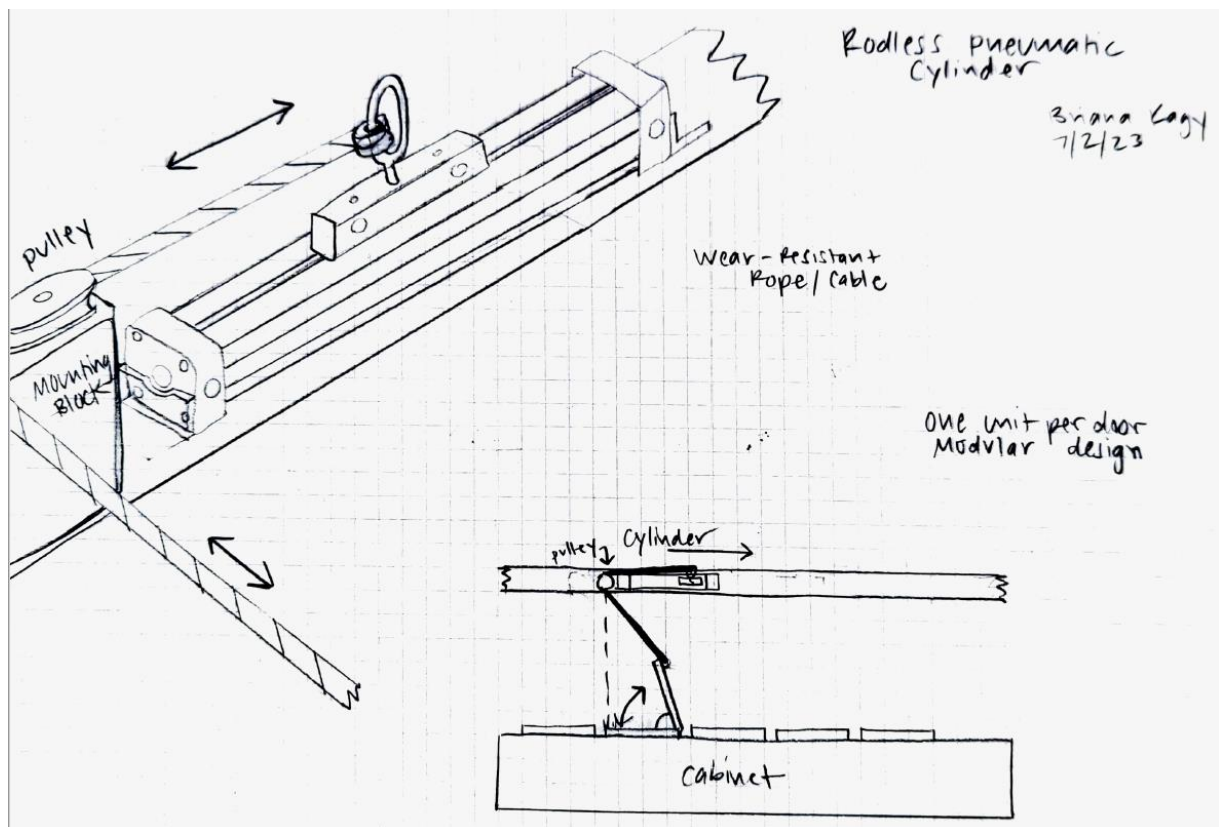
Rodless Pneumatic Cylinder and Pulley System Concept Drawing
